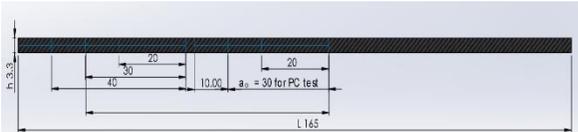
Scheme in all dimensions according to ASTM for ENF Specimen
